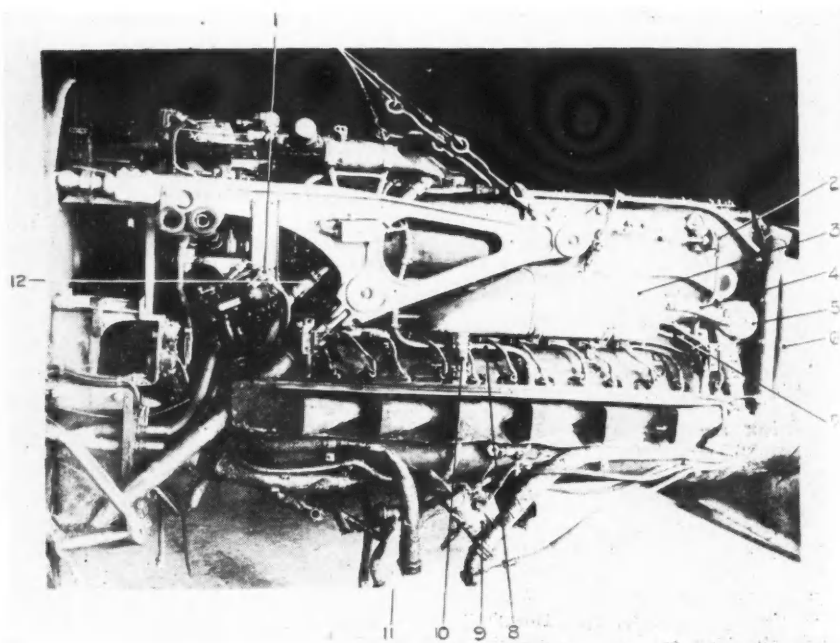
Starboard side of engine, showing coolant tank 3 and external swirl chamber 4
